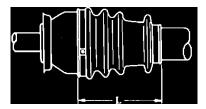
Driveshaft outer boot installation. Pathfinder & 4WD Pickup
